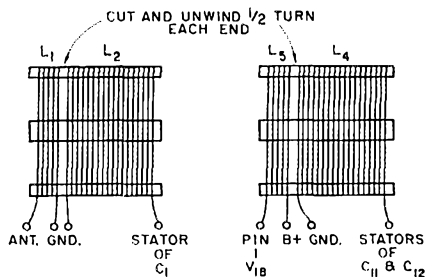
This drawing shows the method of making the coils from the Miniductor coil stock.
